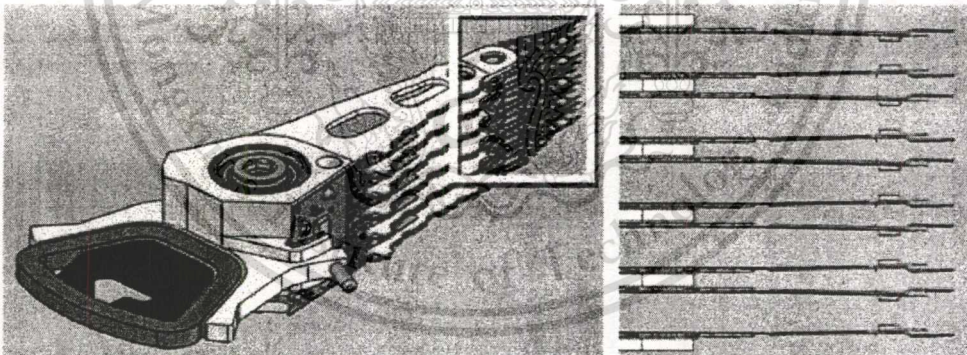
Head Stack Assembly and zoom in Head Gimbals Assembly 10 heads
